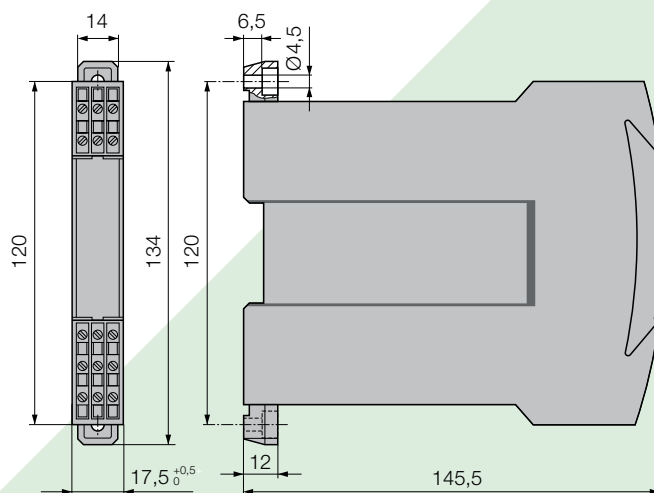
SINEAX TV 808 in housing S17, screw hole mounting brackets pulled out.
